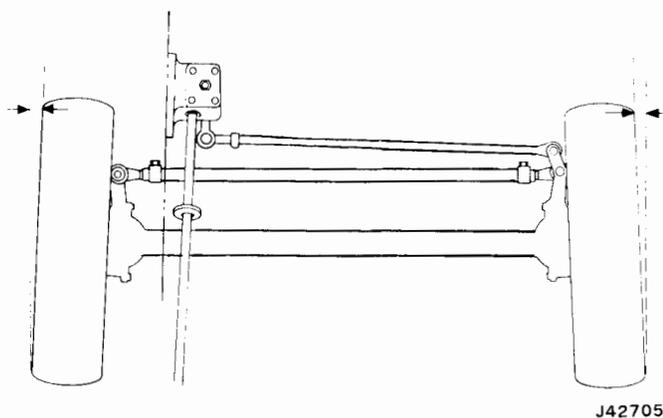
Front Wheel Toe-In (Top View)—Typical
